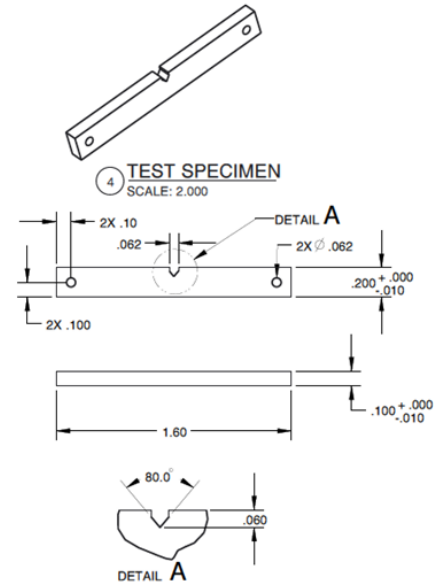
Specimen drawing. Single edge bend specimen, SE(B), dimensions in inches.
